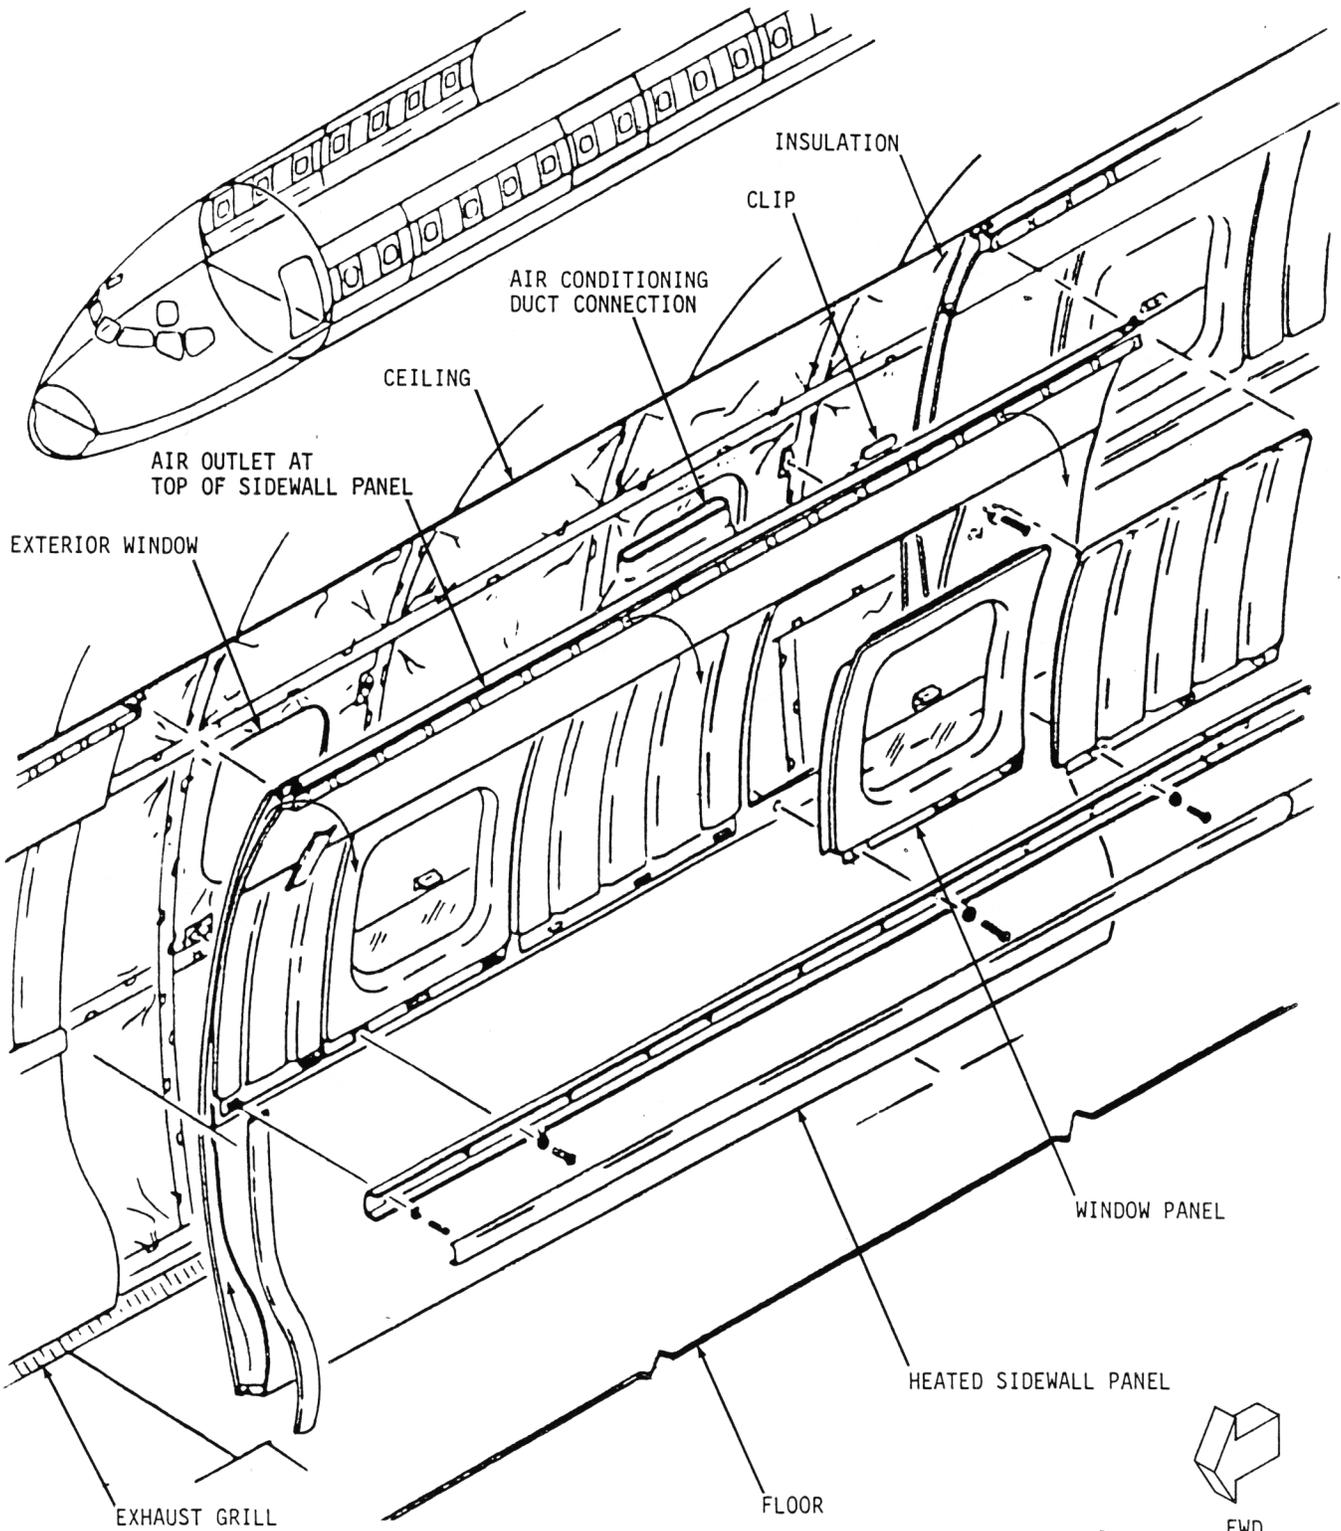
DC-8 SIDEWALL PANEL AND OUTLET
